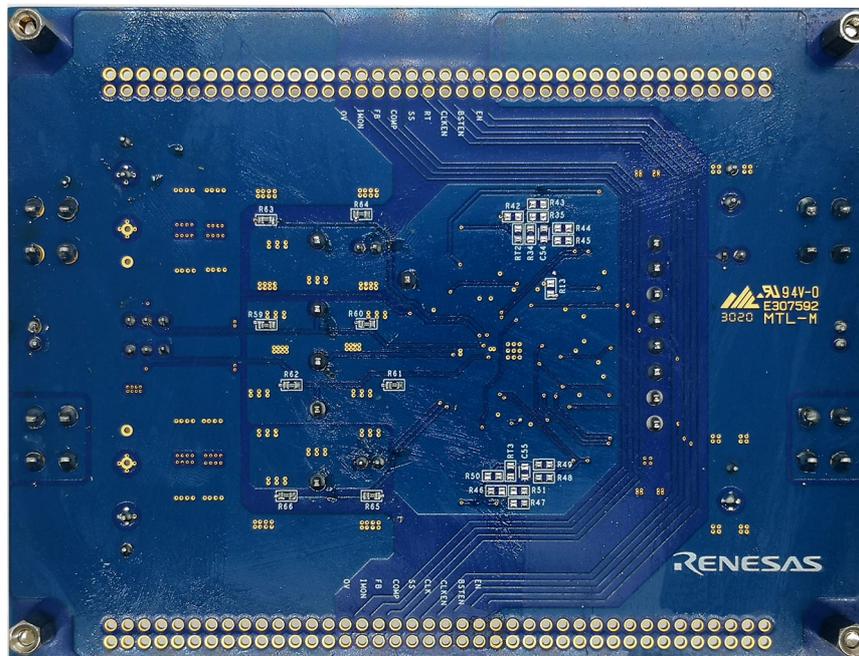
ISL81805EVAL1Z Evaluation Board, Bottom View
